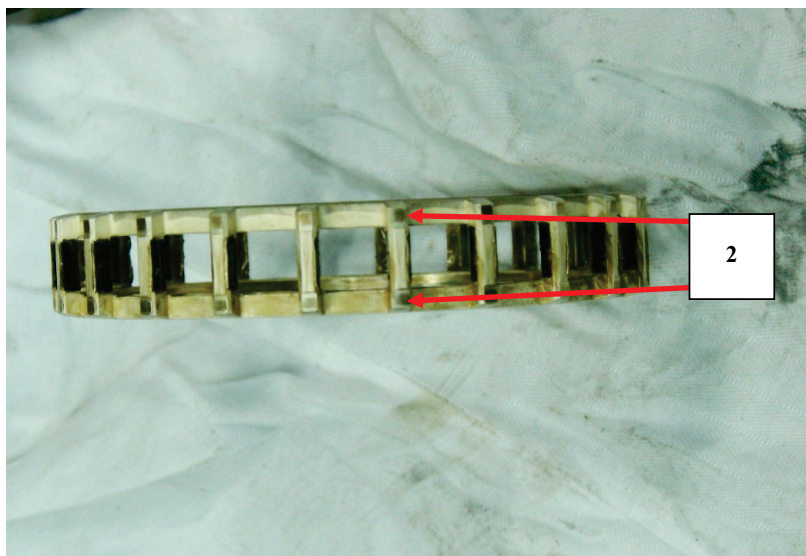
Central bearing cage – vertical projection – with traces of rubbing against the bearing inner race orifice: 2 – grinding traces on separating elements
